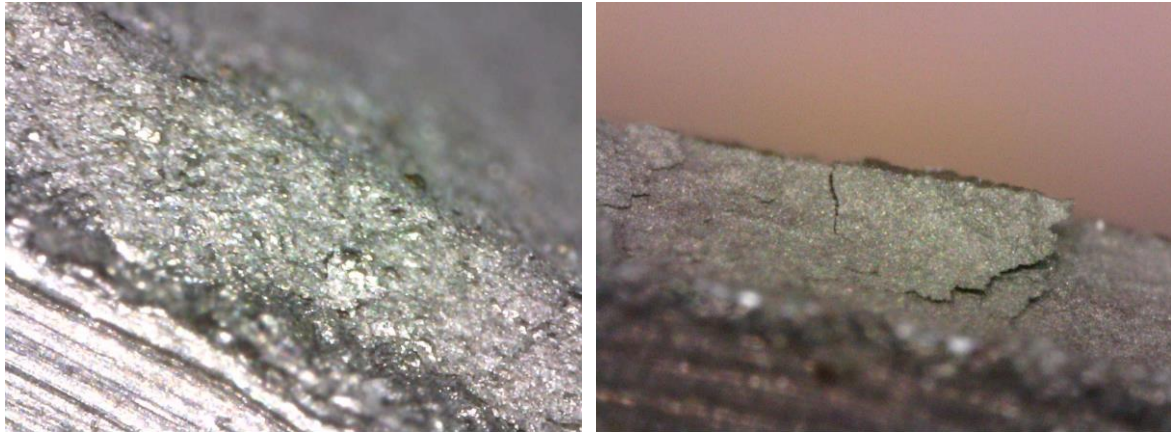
Fracture surfaces (230 magnification); a) Hastelloy C-276, b) CrC-NiCr.
